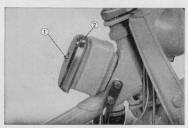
Removing air cleaner (C 90, CT 90)
